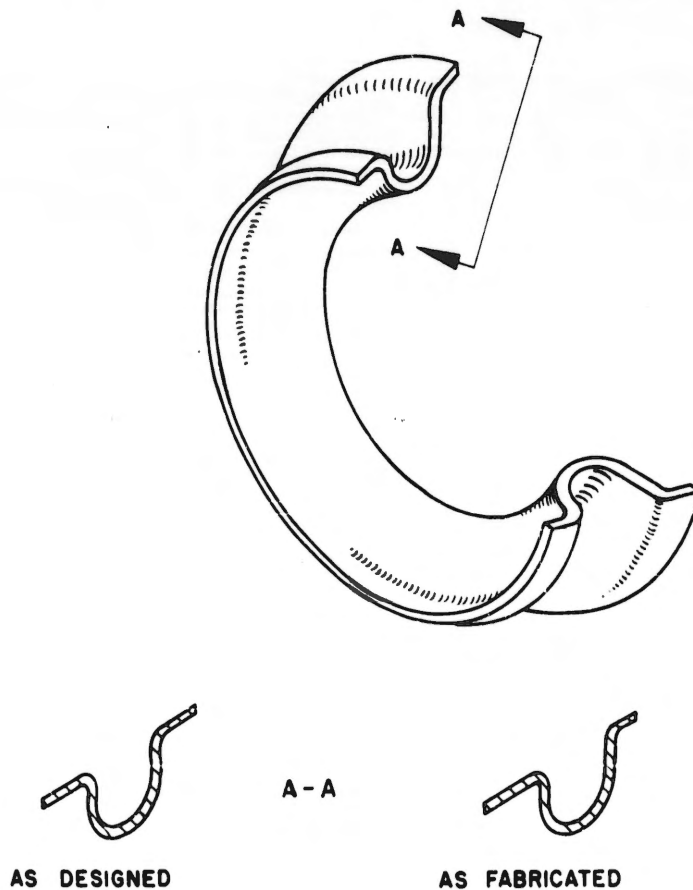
Extreme Twist Causing Displacement of Metal in Stretch Forming
